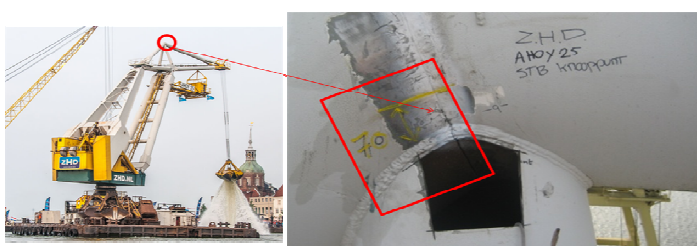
Weld crack at top boom transshipment crane of lemniscate type (Maja Stuwadoors BV, 2016)
